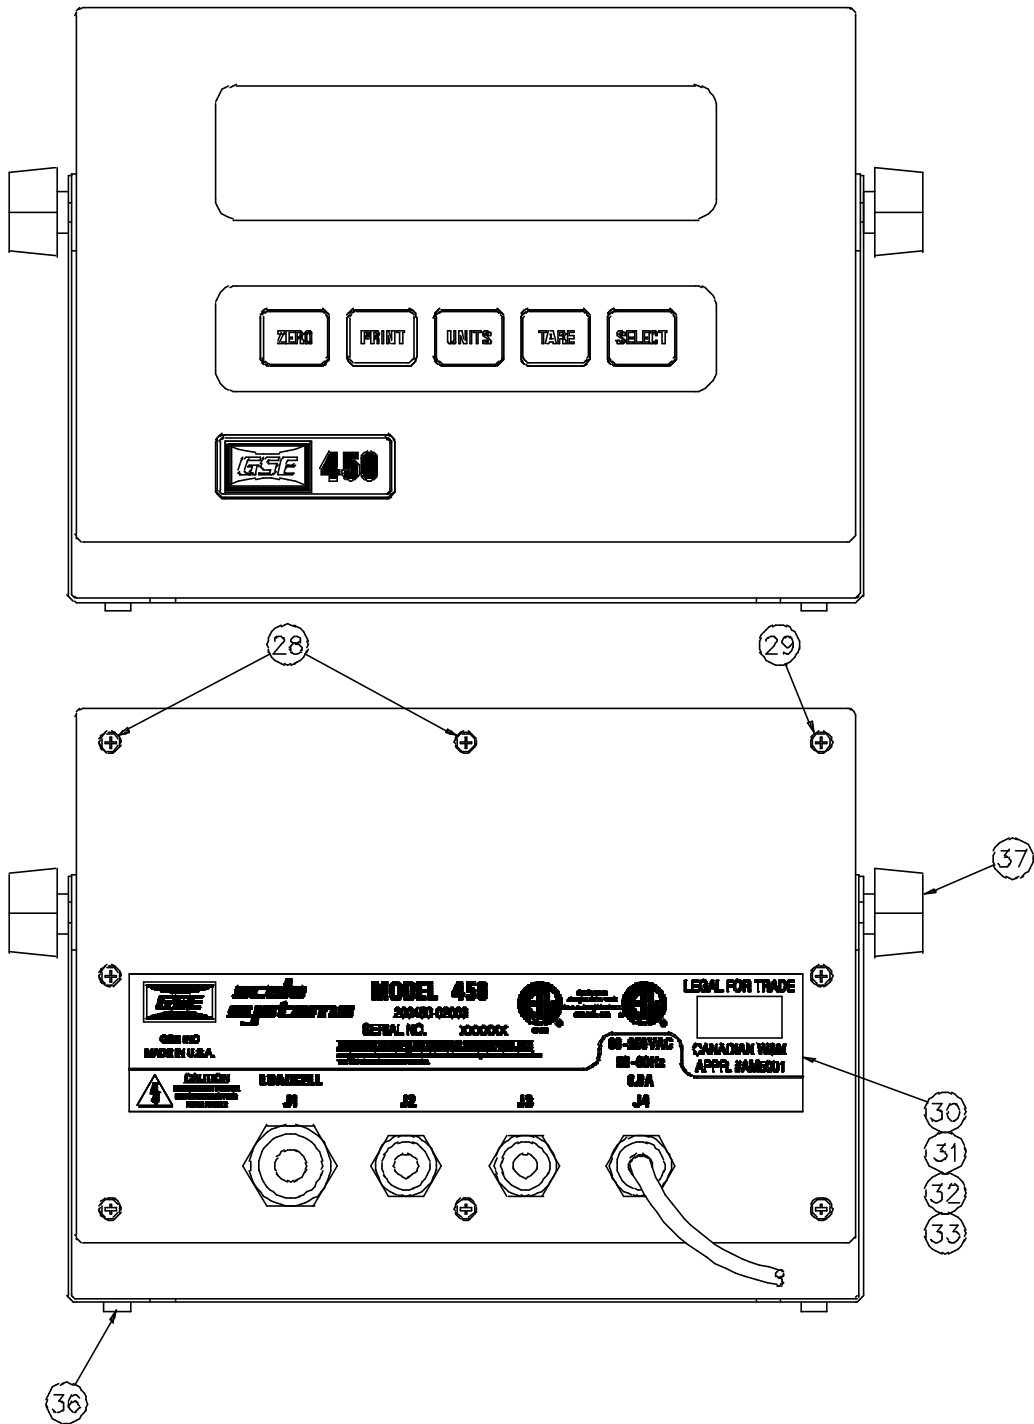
Front/Rear enclosure views of M450 *internal* power supply version
